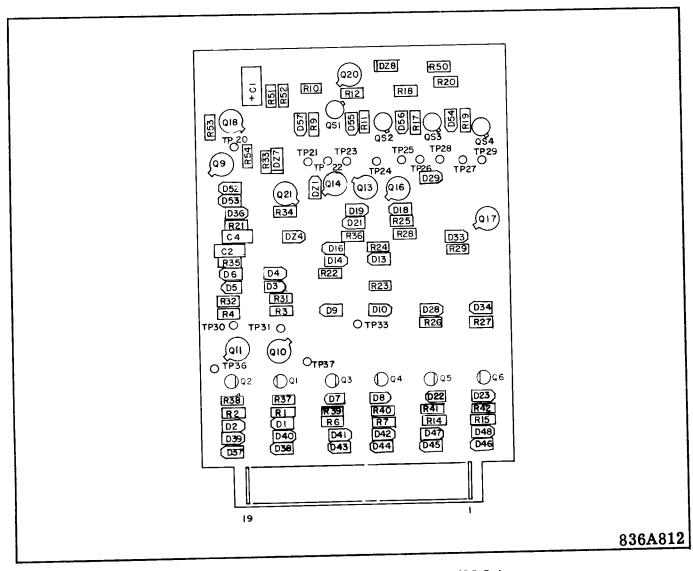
Printed Circuit Board Assembly for the SDB Relay.
